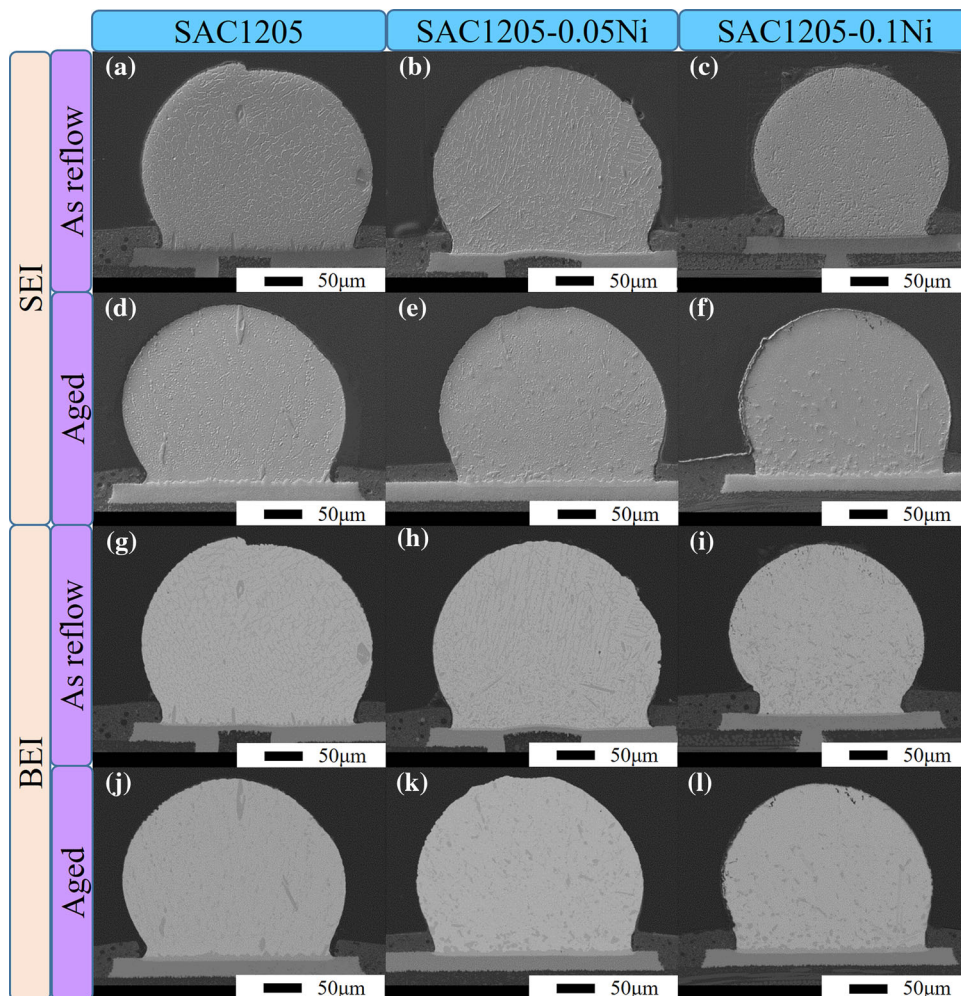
Secondary electron images of (a) SAC1205/OSP Cu solder joints; (b) SAC1205-0.05Ni/OSP solder joints; (c) SAC1205-0.1Ni/OSP Cu solder joints; (d) Aged SAC1205/OSP Cu solder joints; (e) Aged SAC1205-0.05Ni/OSP solder joints; (f) Aged SAC1205-0.1Ni/OSP Cu solder joints; Back scattering electron images of (g) SAC1205/OSP Cu solder joints; (h) SAC1205-0.05Ni/OSP solder joints; (i) SAC1205-0.1Ni/OSP Cu solder joints; (j) Aged SAC1205/OSP Cu solder joints; (k) Aged SAC1205-0.05Ni/OSP solder joints; (l) Aged SAC1205-0.1Ni/OSP Cu solder joints.
